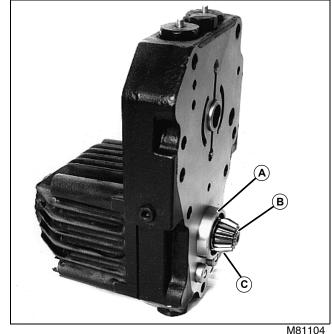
Wheel Drive Shown (MFWD similar)
